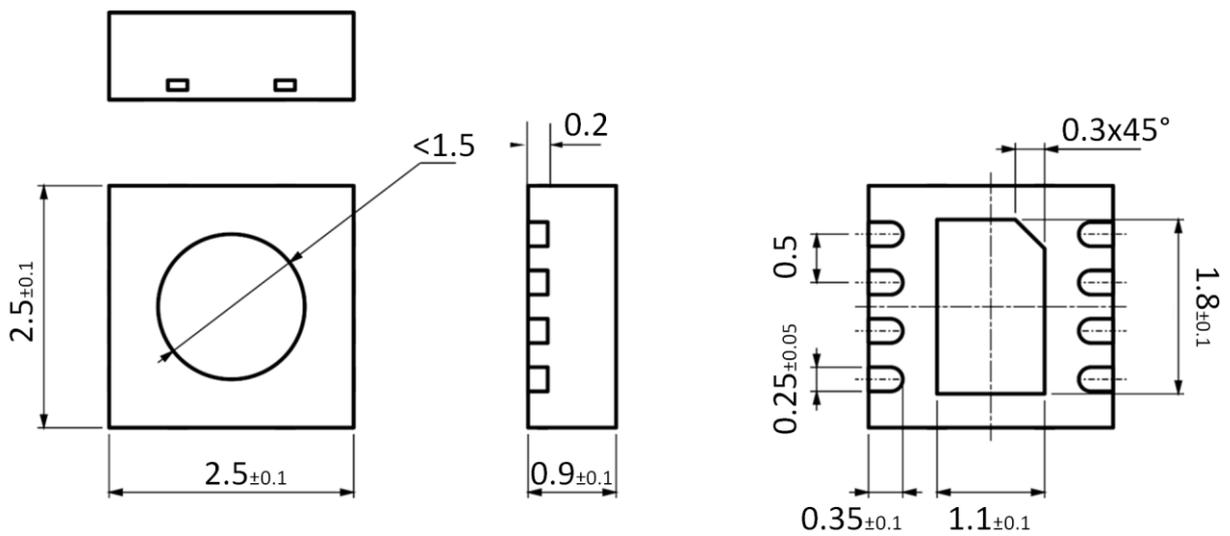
Dimensional drawing of the SHT3x including (units mm).
